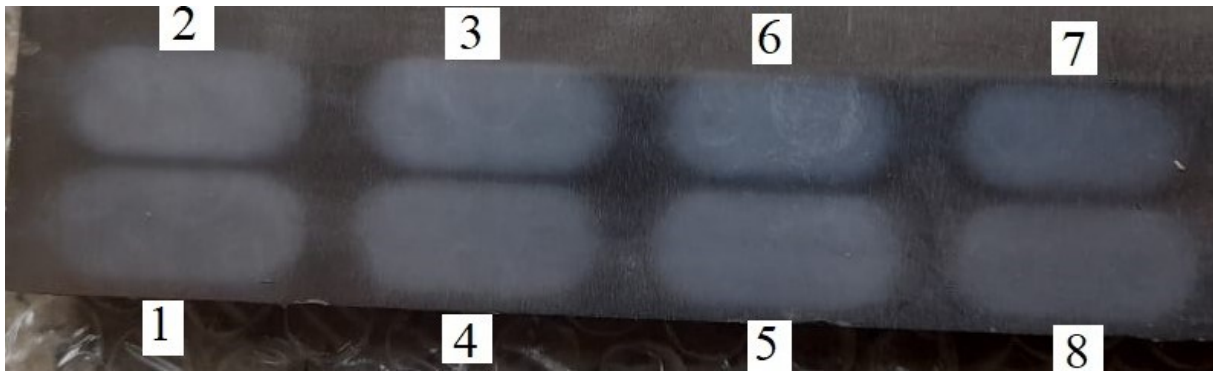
AISI H13 workpiece specimen polished with rotary two-nozzle fluid-jet tool with 2 to 16 number of polishing passes.
